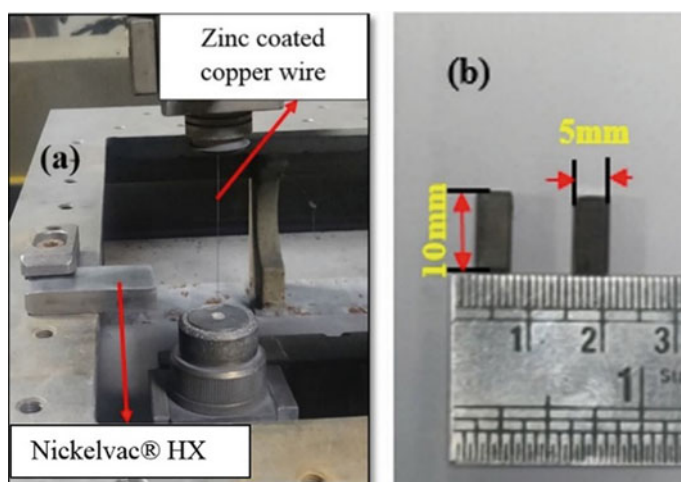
a Nickelvac HX fixed in WEDM table b Machined workpiece considered for investigation
